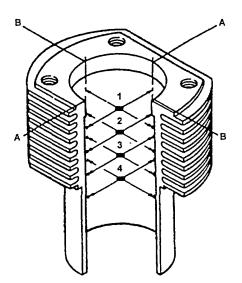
CYLINDER MEASUREMENT POINTS
